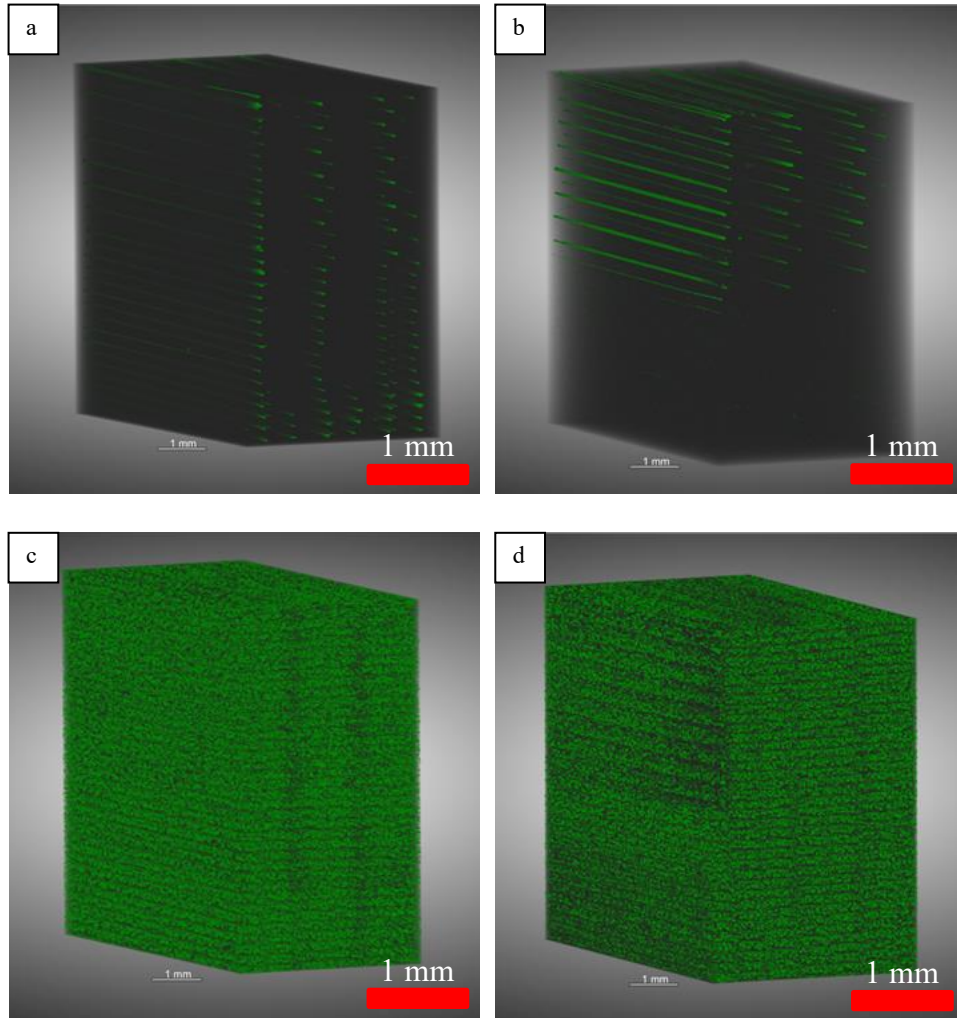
3D views of the porosity of the whole section of: PEKK parts printed at an EM of (a) 1 and (b) 1.05; and CF-PEKK parts printed at an EM of (c) 1 and (d) 1.05
